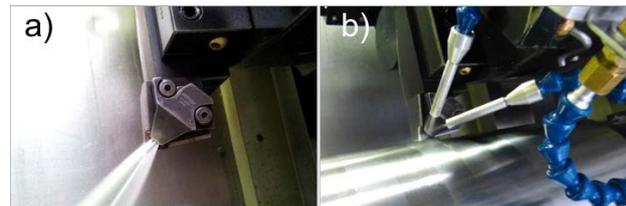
Experimental setup, (a) through tool supply, (b) external supply of ADL with CO_2 cooling via nozzles.
